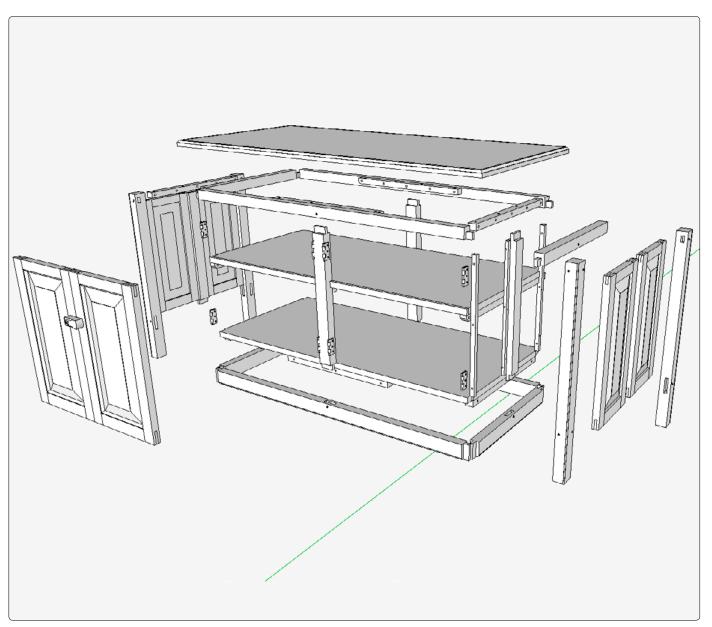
Exploded view of the post-and-panel entertainment cabinet, showing the beefy rails that connect the legs. A small bead on the outside corner of the legs helps lighten the appearance of the piece.
